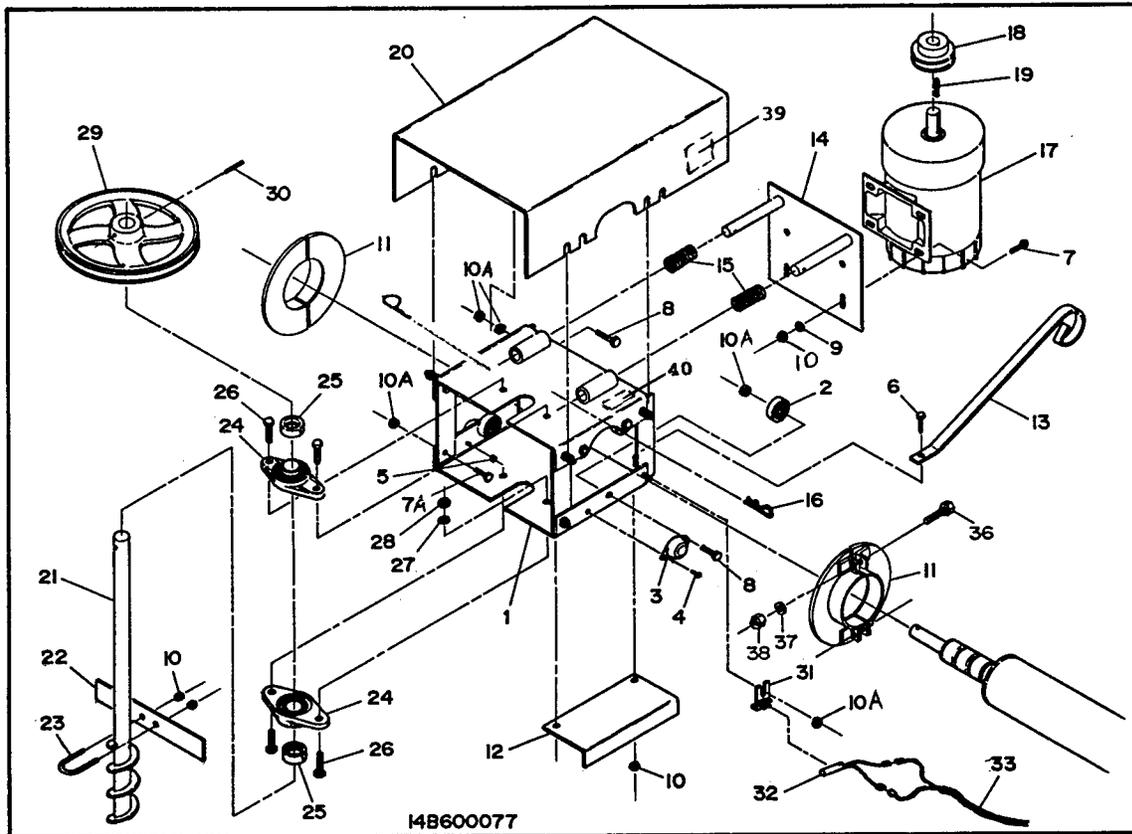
OUTSIDE CARRIAGE (STIRWAY II) PARTS
